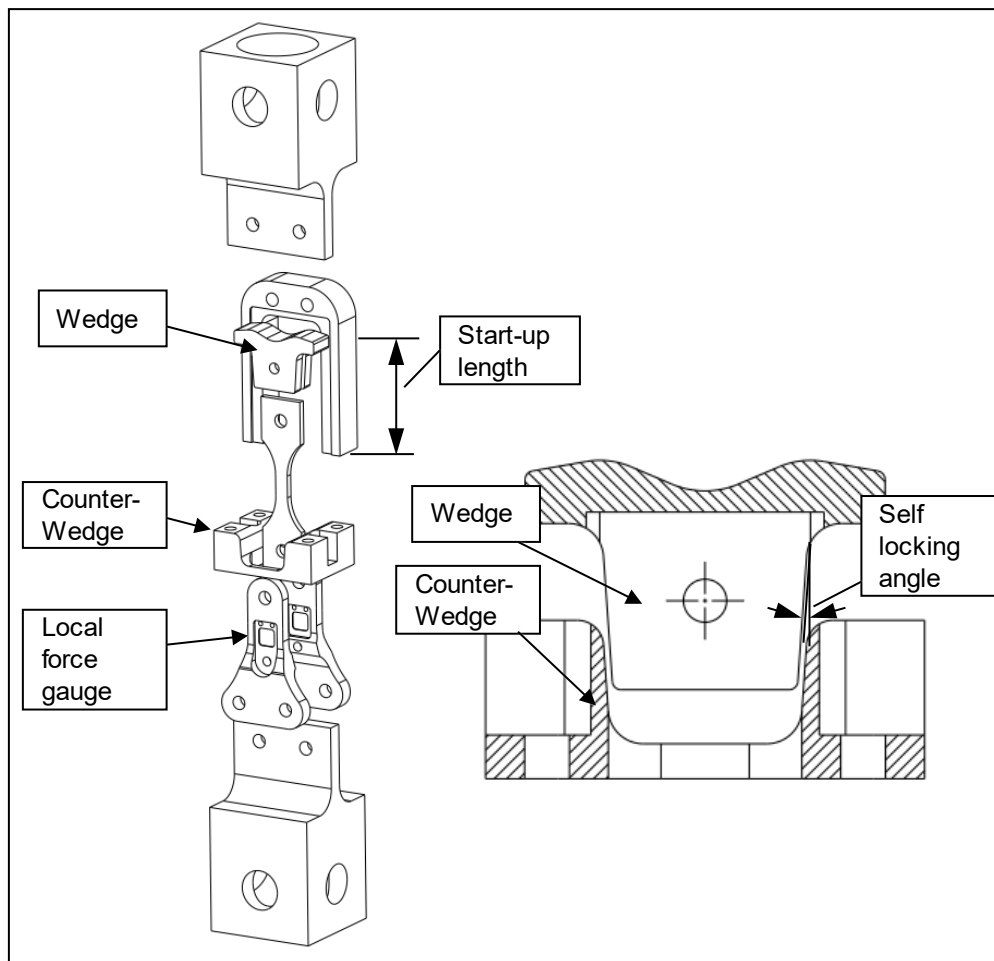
Explosion view of high-speed tensile test device (HTTD) with a detailed view of self-locking wedge and counter-wedge as coupling mechanism between specimen and tensile test machine.
